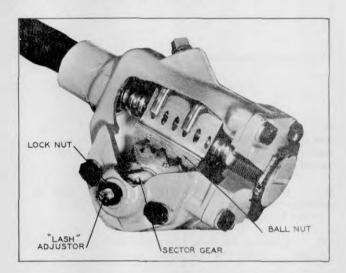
Steering Gear Lash Adjustment (Sector Gear)
